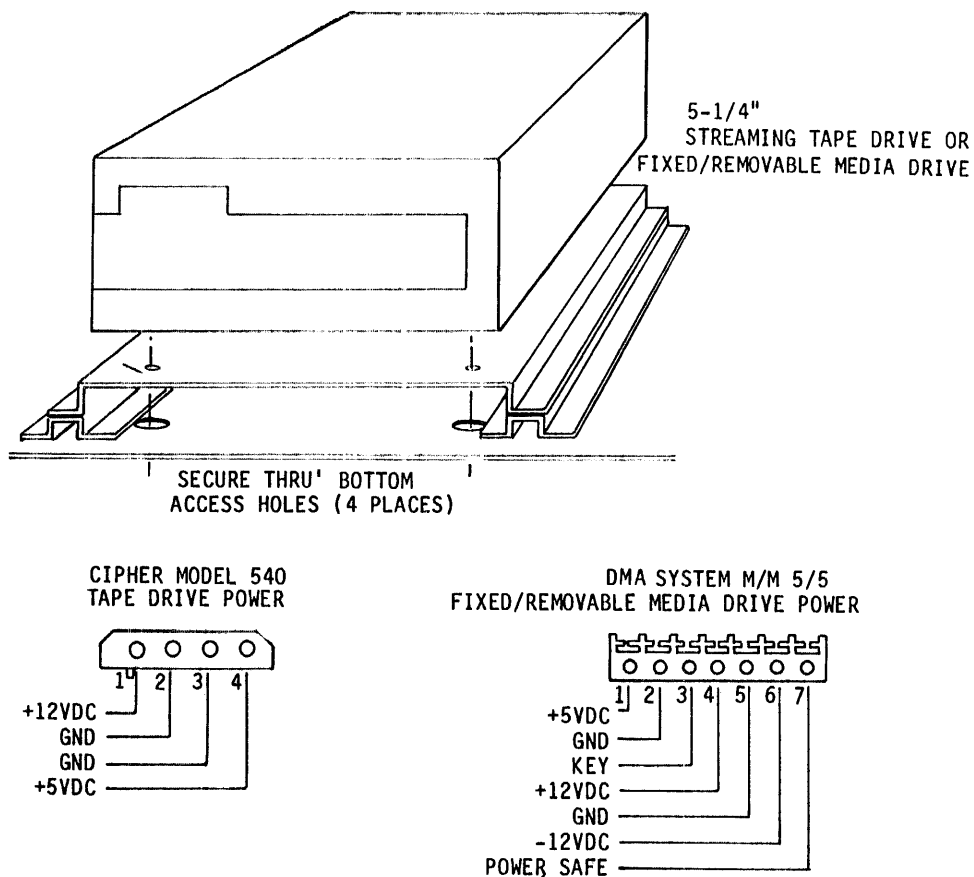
5-1/4" REMOVABLE MEDIA DRIVE MOUNTING
